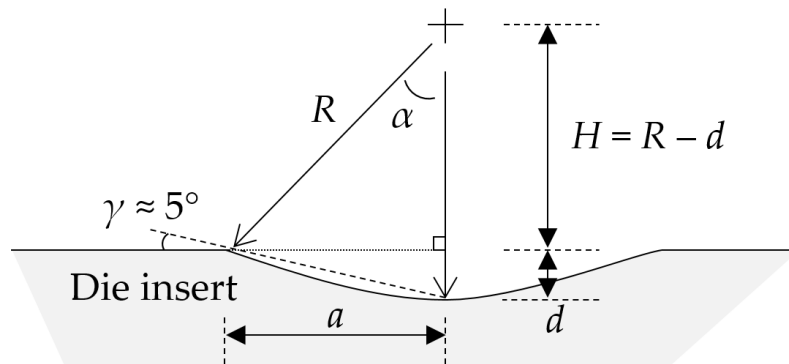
Selection of milling tool based on lubricant pocket geometry.
